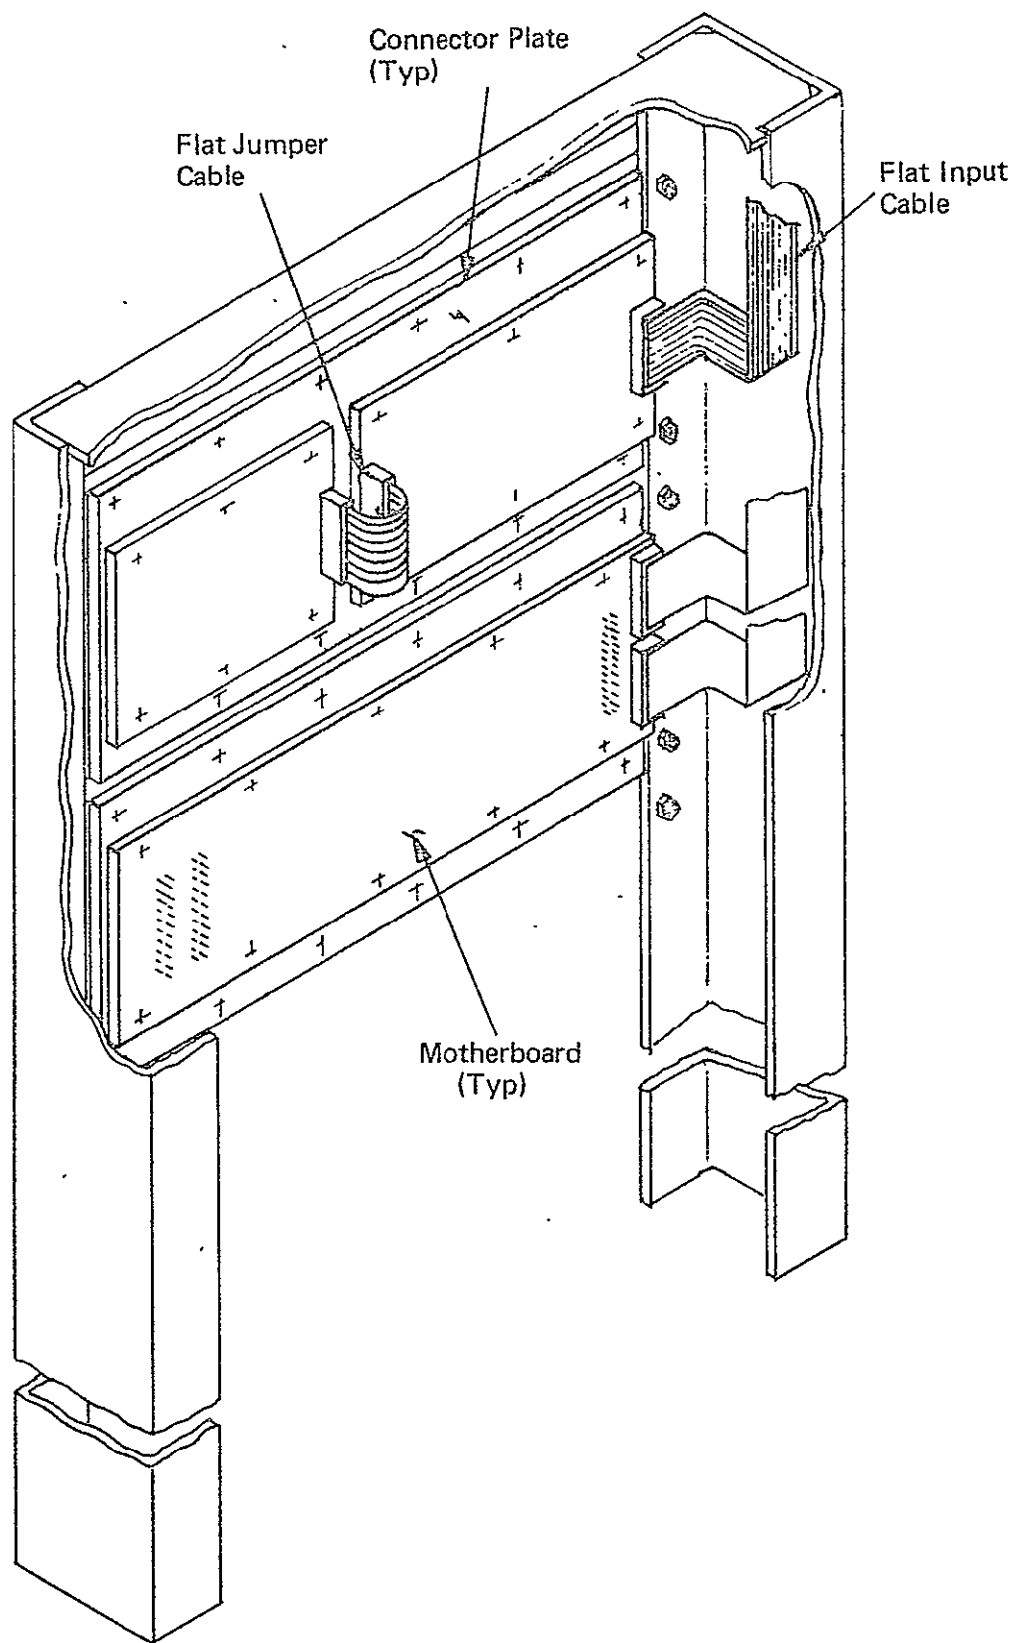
MODULE EQUIPMENT RACK (REAR)
